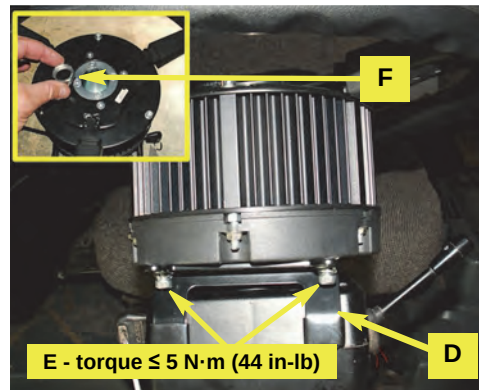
with inset: Securing the steering wheel and anti-rotation bracket (21nn-71nn models)
